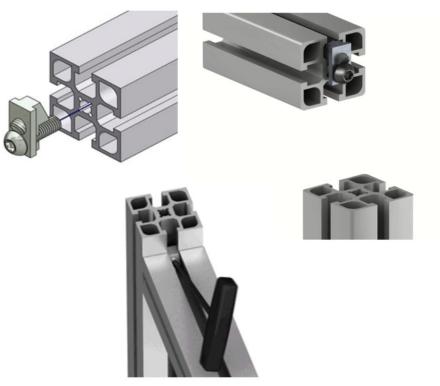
Power Lock Fasteners in use (Minitec Framing)
